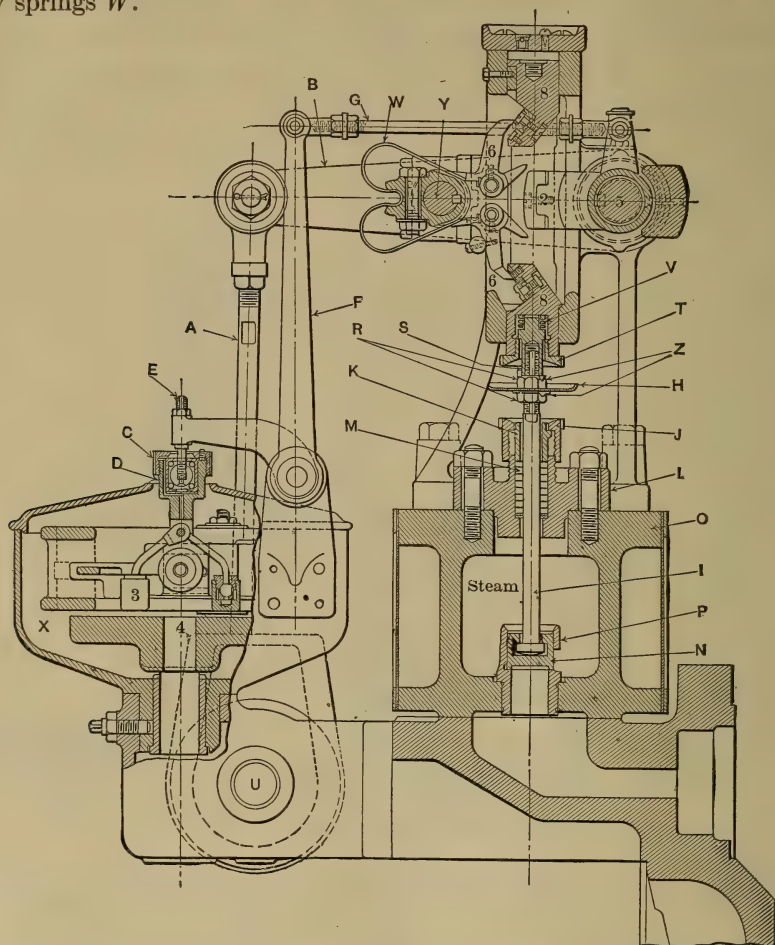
Assembly of Mechanical Valve Gears for 300-Kw. Curtis Steam Turbine.
